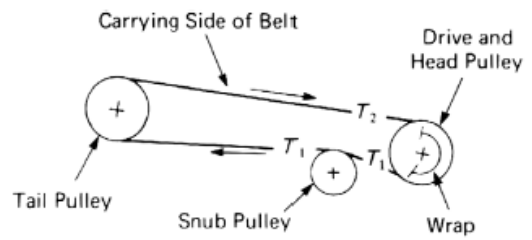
G Single-pulley drive at head end of conveyor with snub pulley; regenerative.
